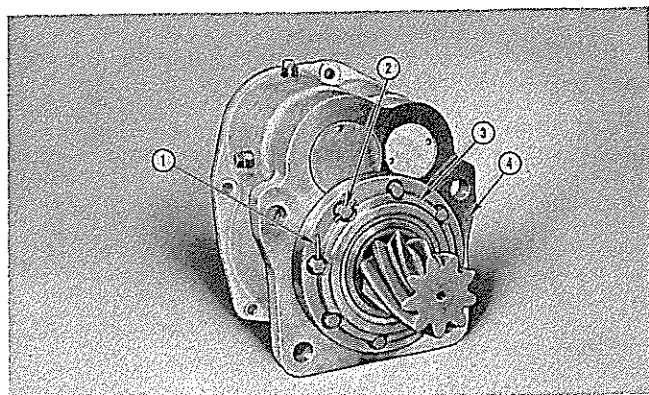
BEARING RETAINER AND CAPSCREWS
